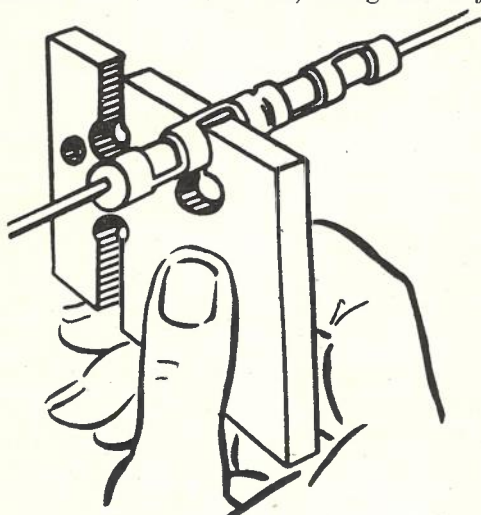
Use of gauge to check dimensions of jointing clamp.
